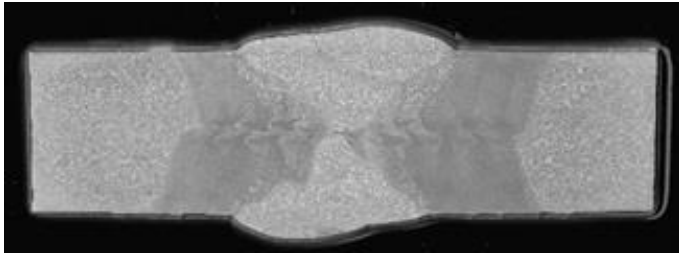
Cross-sectional view of FSPed + welded plates
